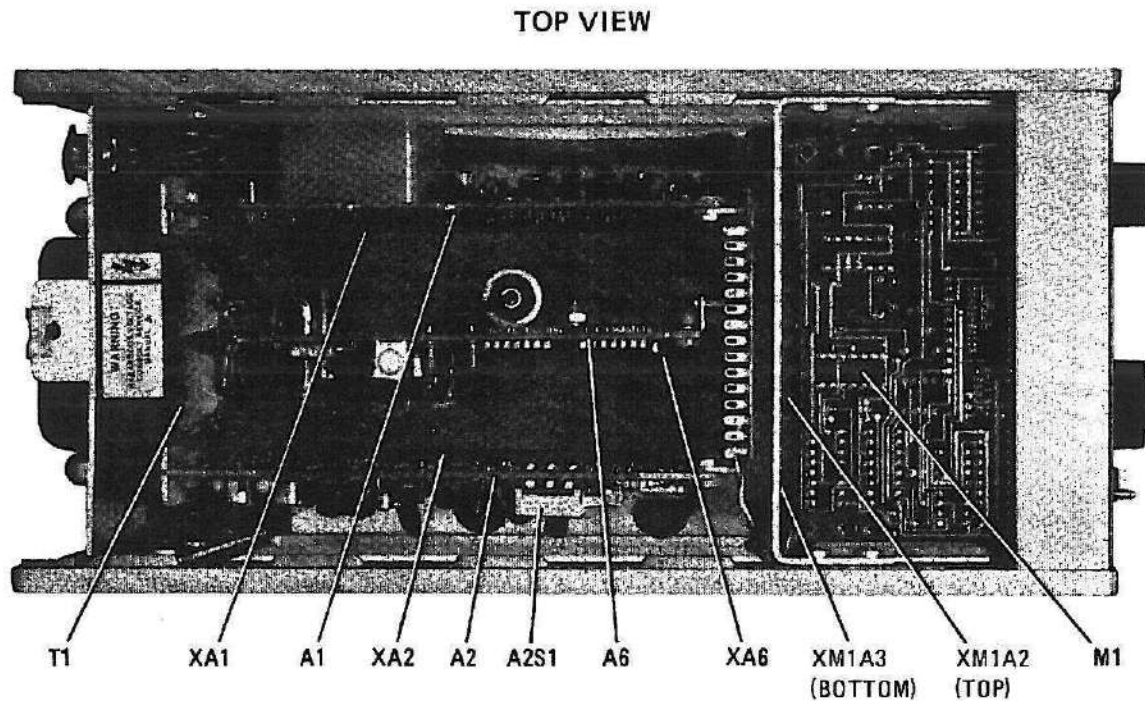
P/O Assembly and Component Locations (P/O Change N)
